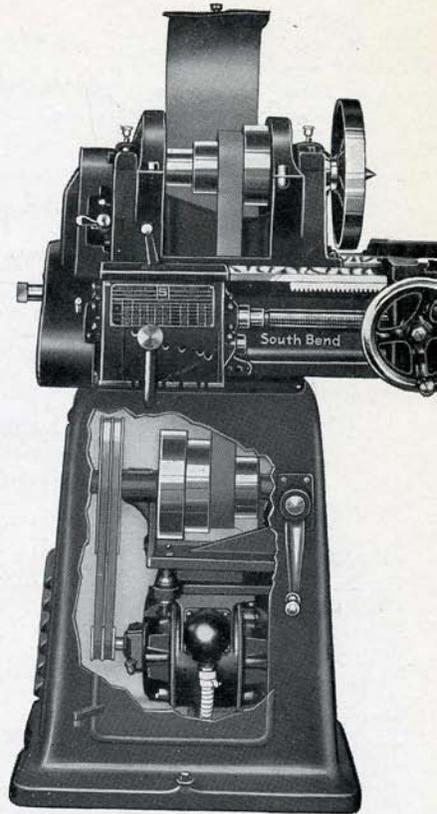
Front View of Lathe with Door Cut Away, Showing Arrangement of Driving Mechanism
